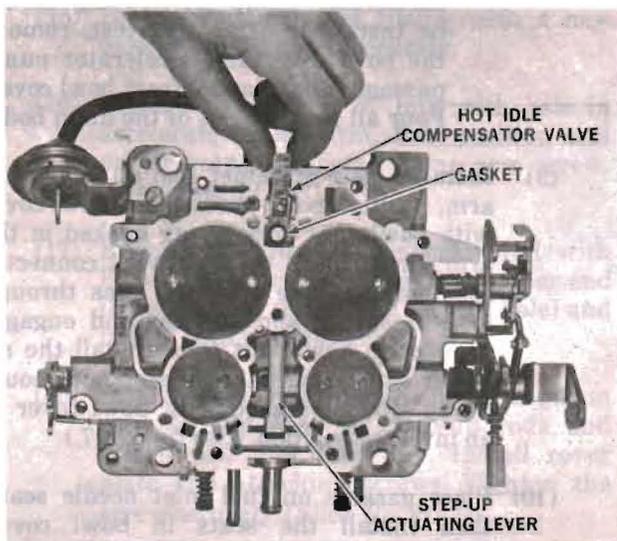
Removing or Installing the Hot Idle Compensator Valve
